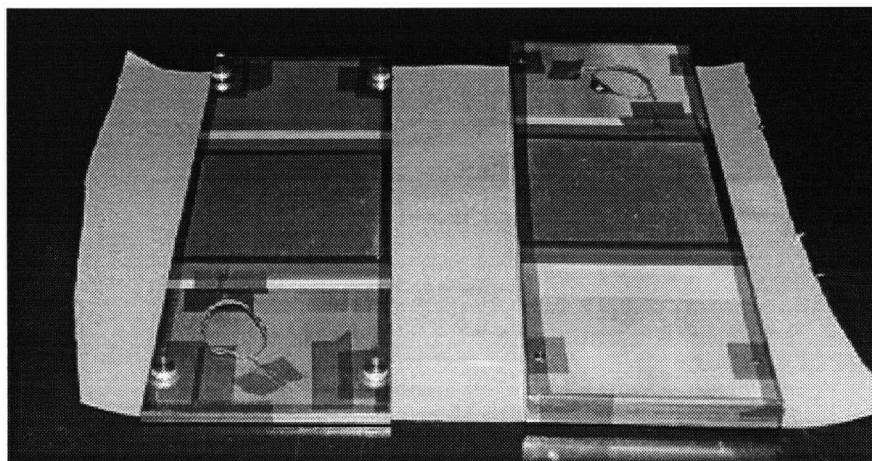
Double lap joint specimens, ready for vacuum bagging
